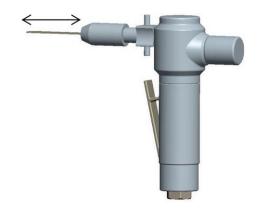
Angle reciprocating polishing/filing with tool holder without moving parts — Designed for two handed operation — Alternative design
